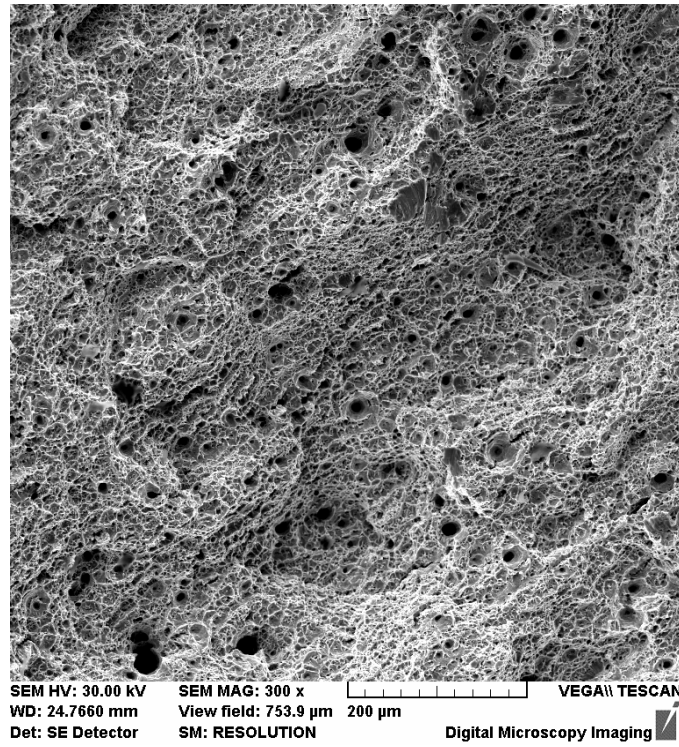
The fracture surface of a specimen cut out across the pipe axis after tensile testing (steel X70),  $\times 300$ .
